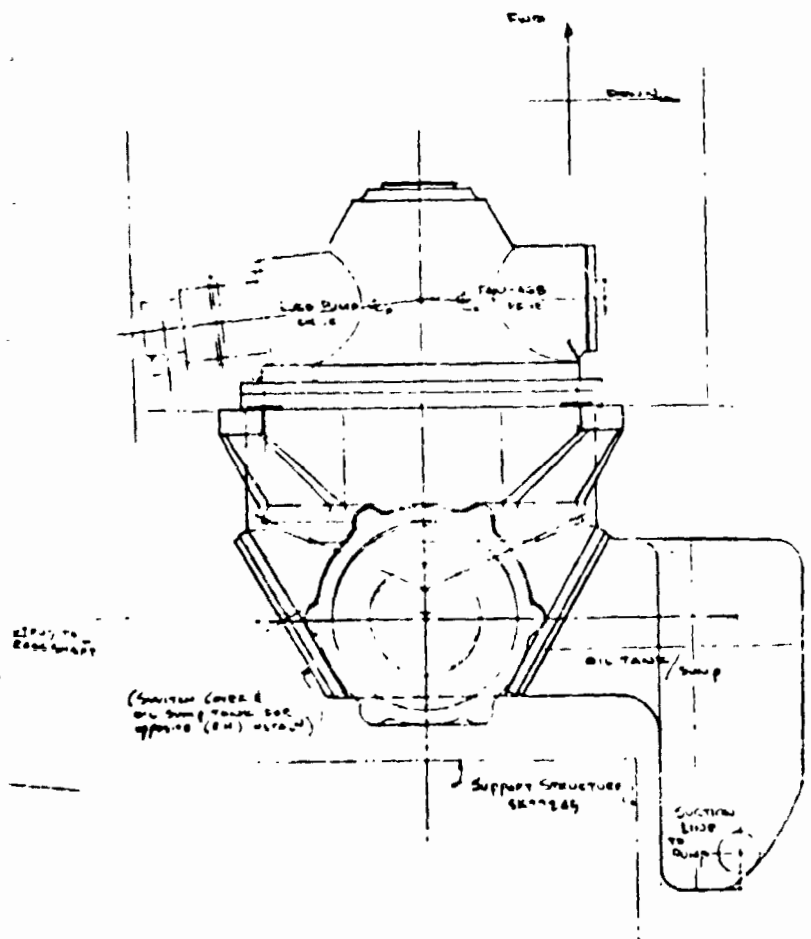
INTERMEDIATE GEARBOX - EXTERNAL VIEWS OF HOUSING - HTR XV-15
